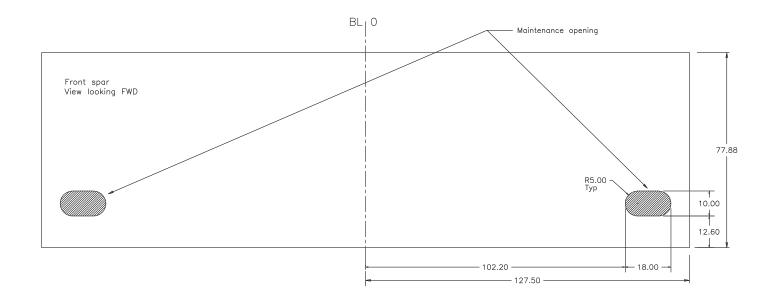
Location of water bottles on Front spar (FS) of CWT. Actual dimensions.
